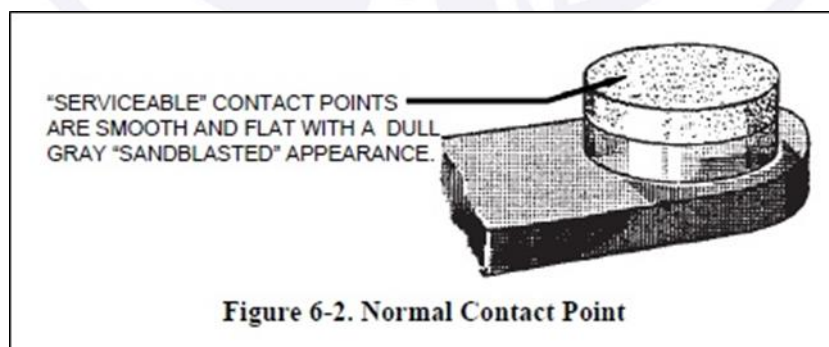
Image taken from the magnetos' manual showing what the appearance of the contact points should be after being removed for inspection.
